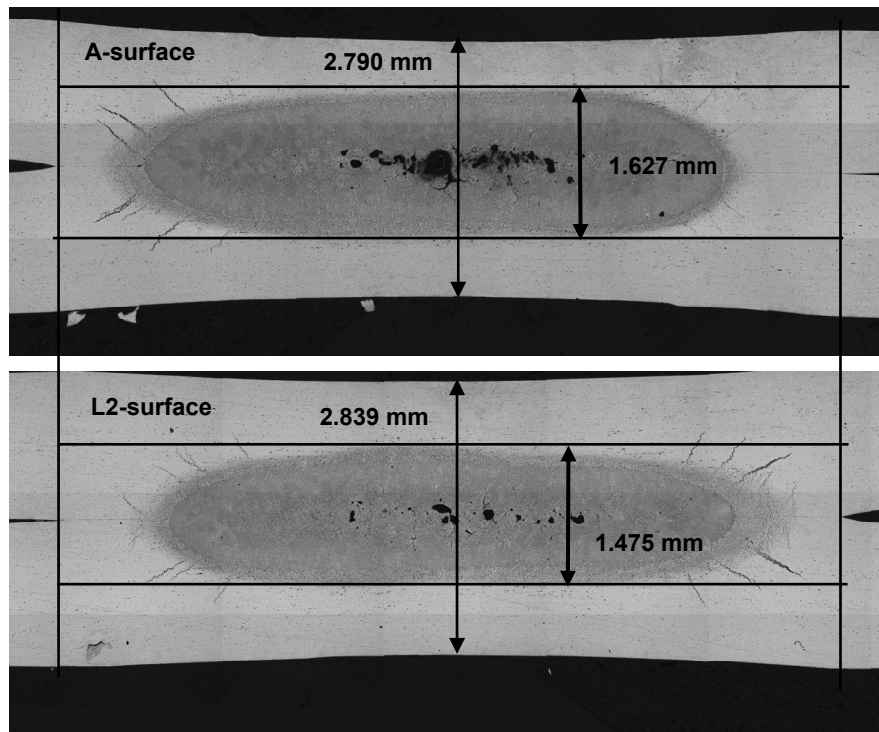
Typical nugget cross section of spot weld of A-surface and L2-surface.
